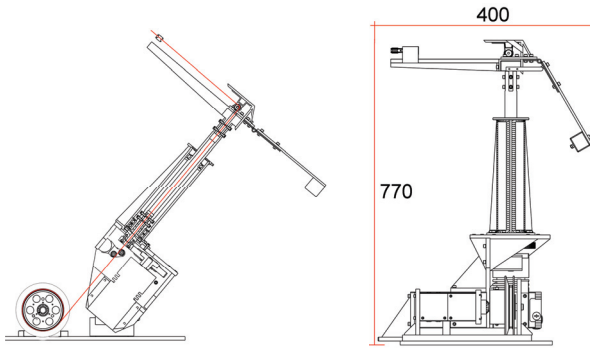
Side view of the casting manipulator with the tether cable highlighted in red (left), and occupancy in millimeters of the robot when deployed in the upright rest position (right).
